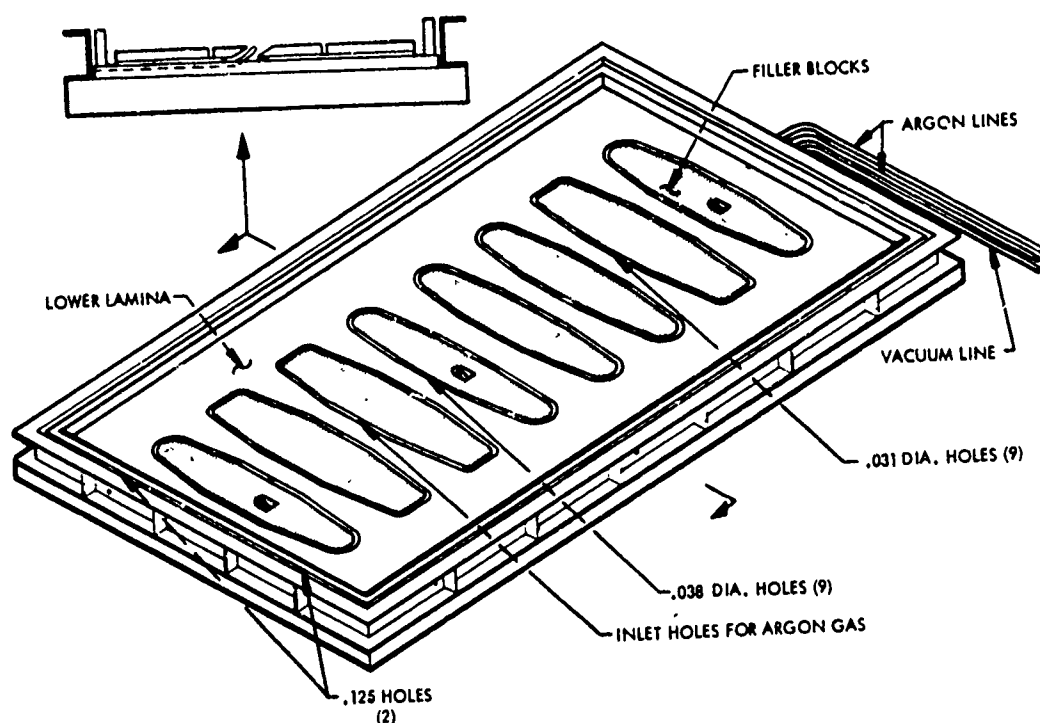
BRAZE BOX ILLUSTRATING ARGON GAS LINES FOR PURGING LOWER LAMINA HOG-OUTS
